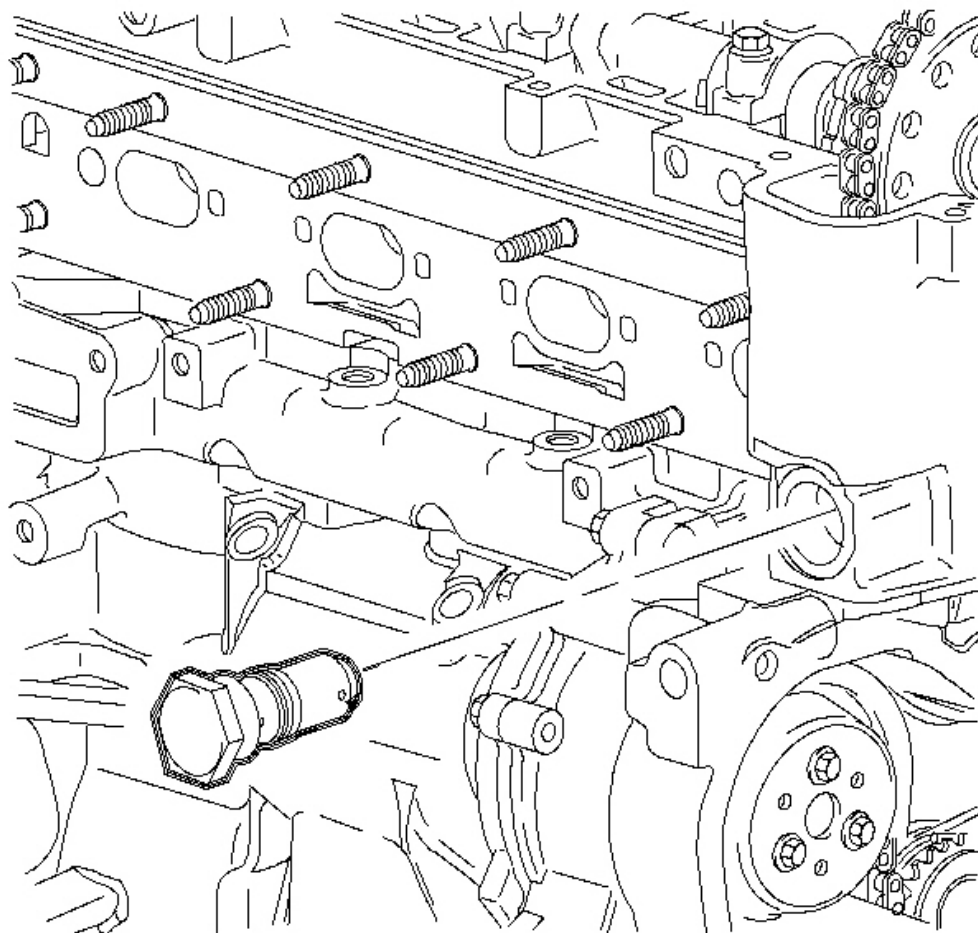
Removing/Installing Timing Chain Tensioner Assembly
